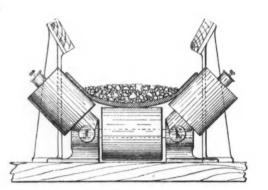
BELT SUPPORT AND SKIRT BOARDS
